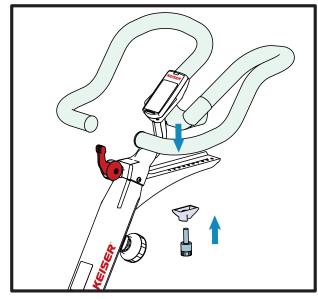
Assemble Handlebar, Handle Stud, and the Handlebar Spacer
